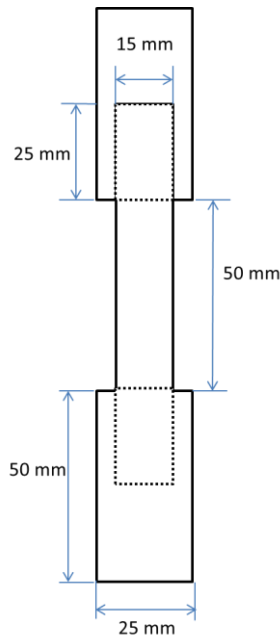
Schematic diagram of the tensile test specimens complete with dimensions. The dotted area corresponds to the part of the test specimen that was attached to the metal tabs.
